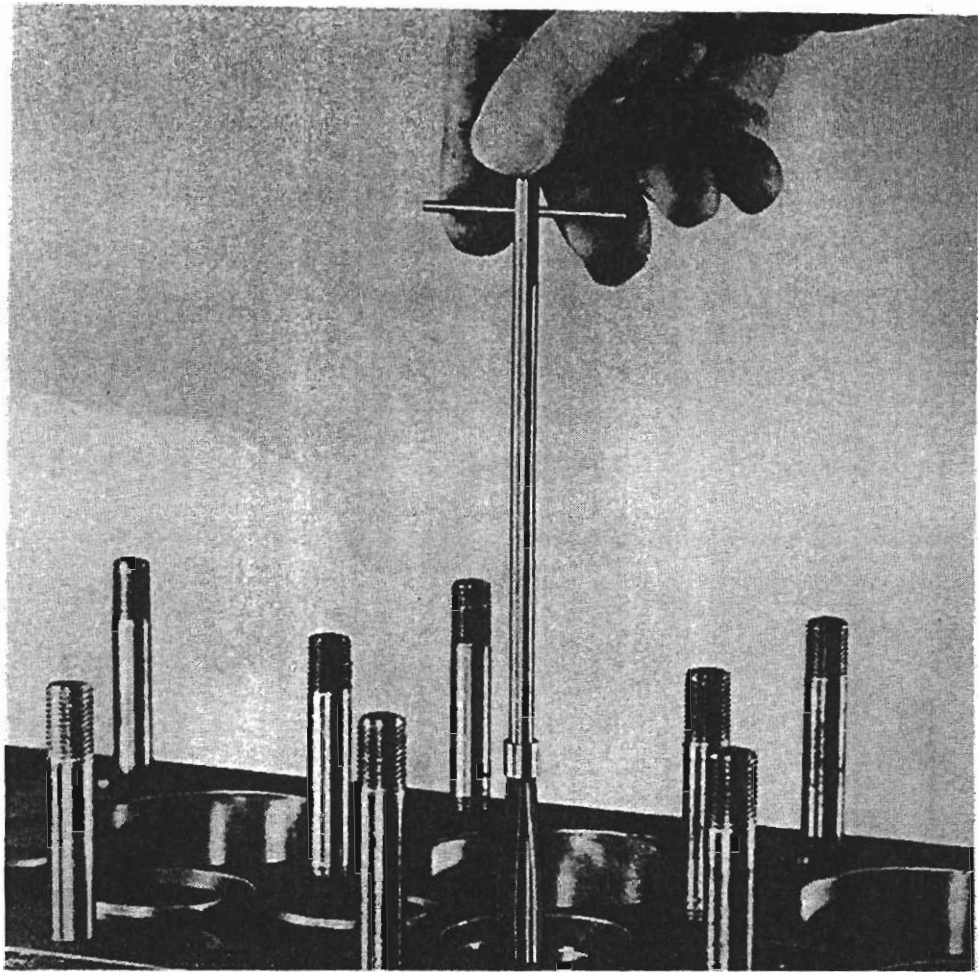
Valve Guides May Be Cleaned with the Valve Guide Cleaner KMO-122 as Shown.
